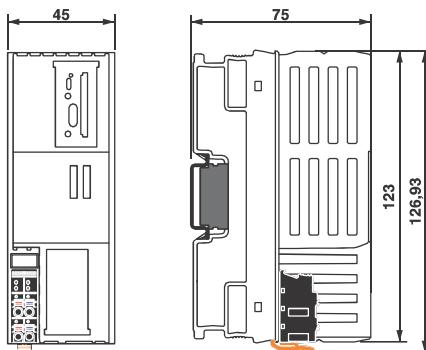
Nominal dimensions of a class 2000 AXC controller housing
